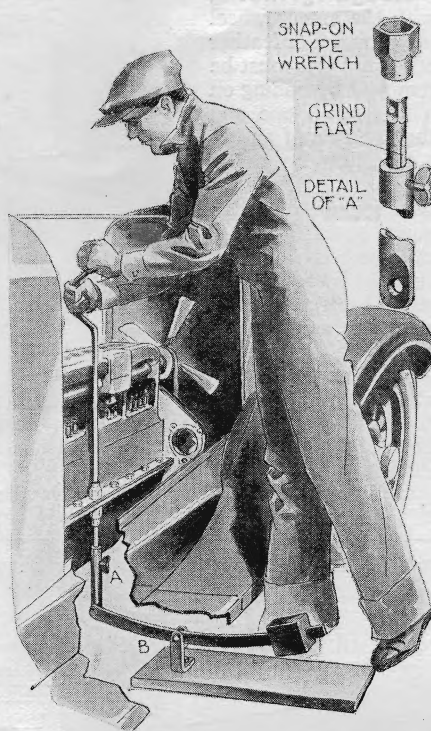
Time and effort are saved by rigging mechanical assistant in turning oil pan nuts.
